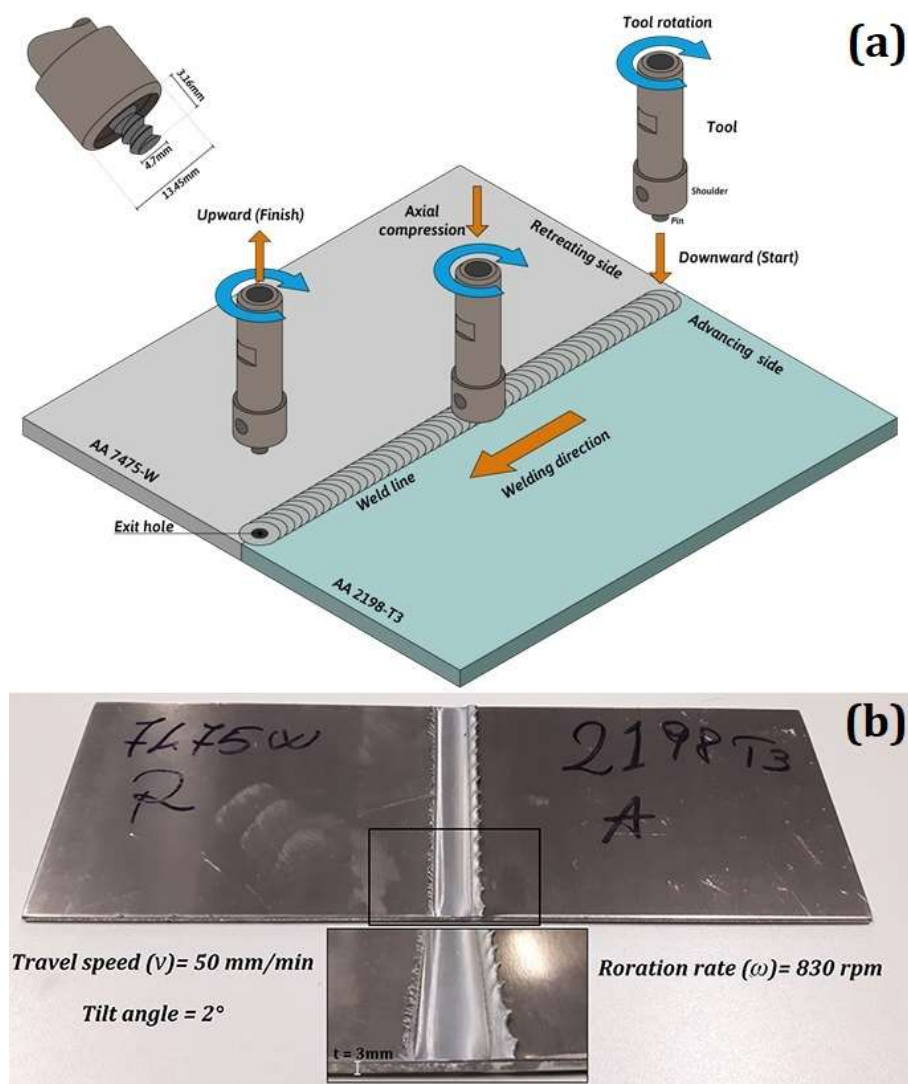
Schematic representation of the FSW process (a) and dissimilar welding between AA7475-W and AA2198-T3 (b).
